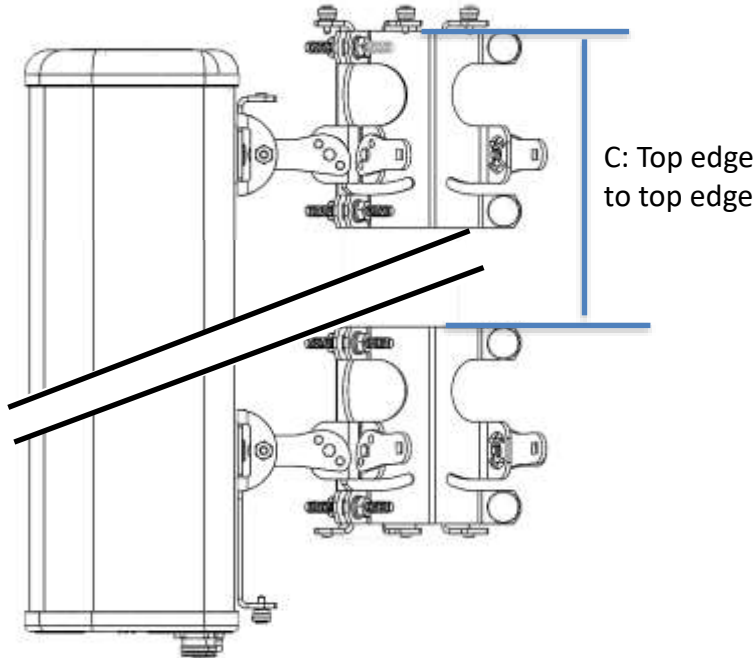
Attach top brackets to pole – 3.5" diameter shown as example
